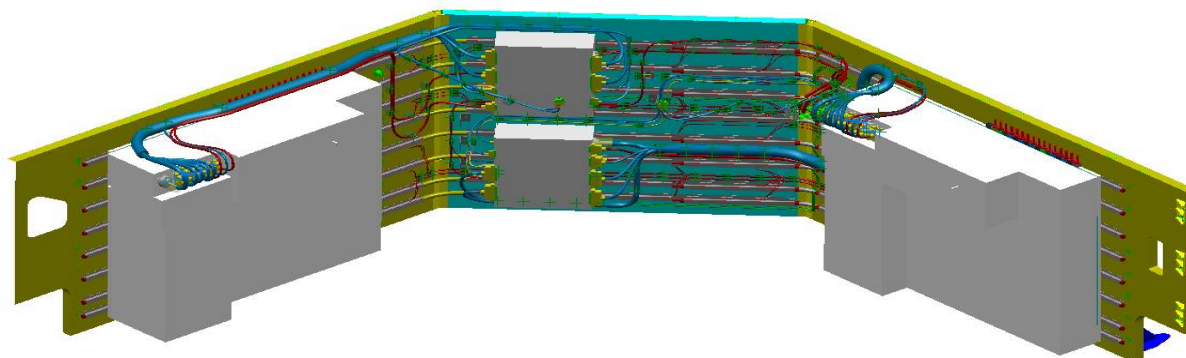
Sorption cooler compressors and electronics integrated on 3 SVM panels, on heat pipes
